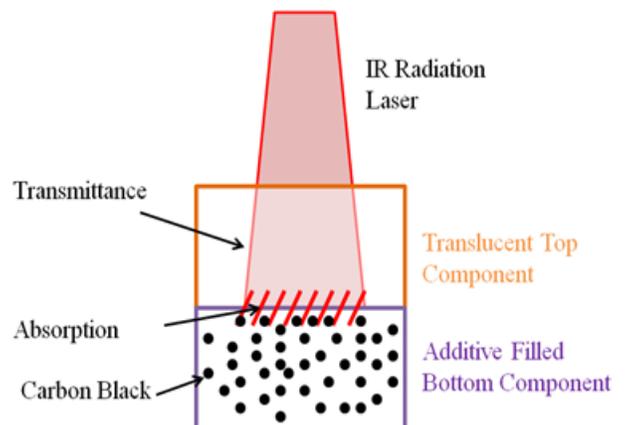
This image depicts the Through Transmission Laser Welding (TTLW) process with a translucent top component and a carbon black additive filled bottom.
